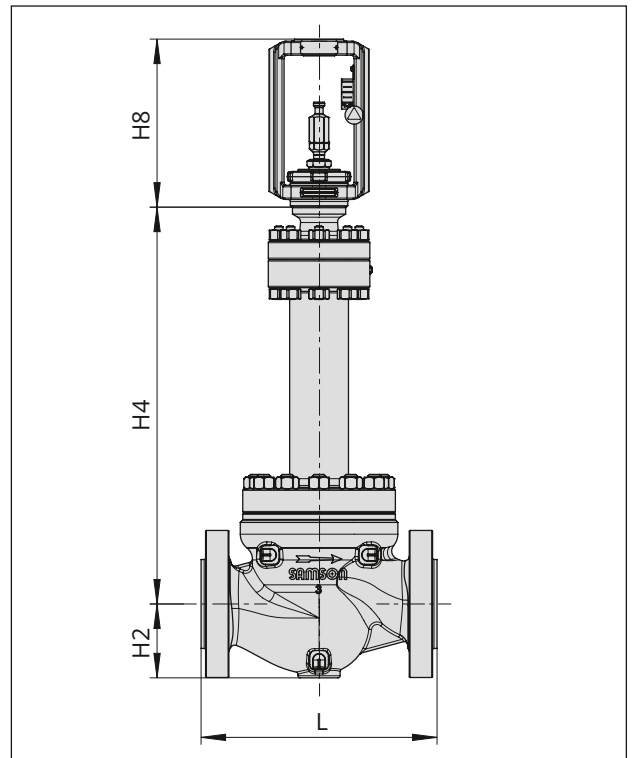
SMS MG-1 Control Valve: Type 251GR Valve with Type 3271 Pneumatic Actuator
